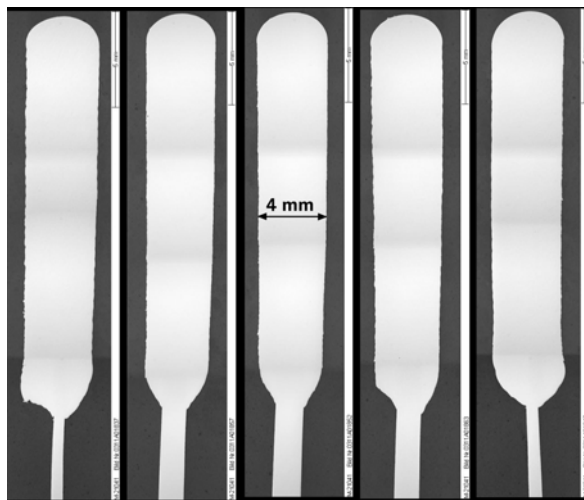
Transverse sections of a laser build-up welded 2D specimen taken from equally spaced locations. The width of the built-up layer is about 4 mm. The height is approximately 21 mm.
